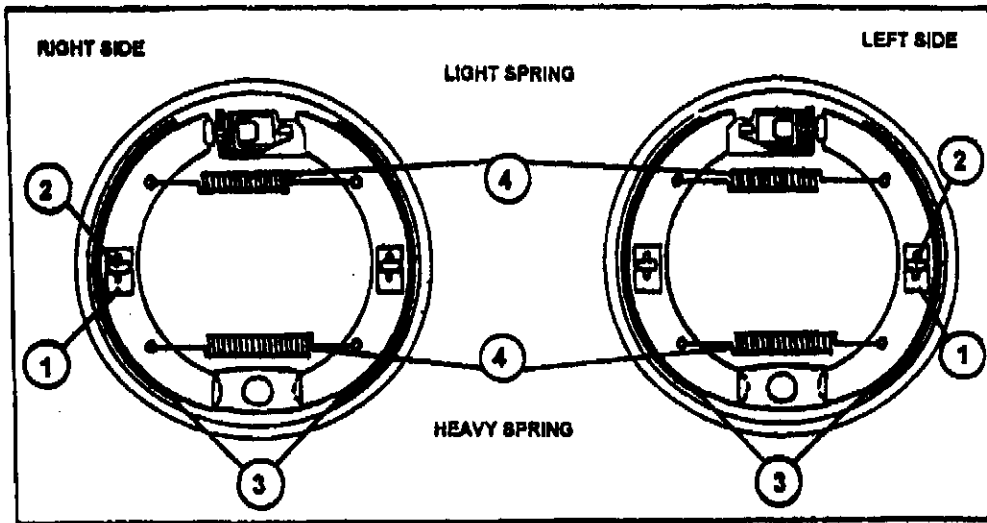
WHEEL BRAKES LEFT AND RIGHT SIDE
